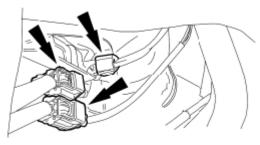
Locating Starter Wire Harness Electrical Connector Courtesy of FORD MOTOR CO.
